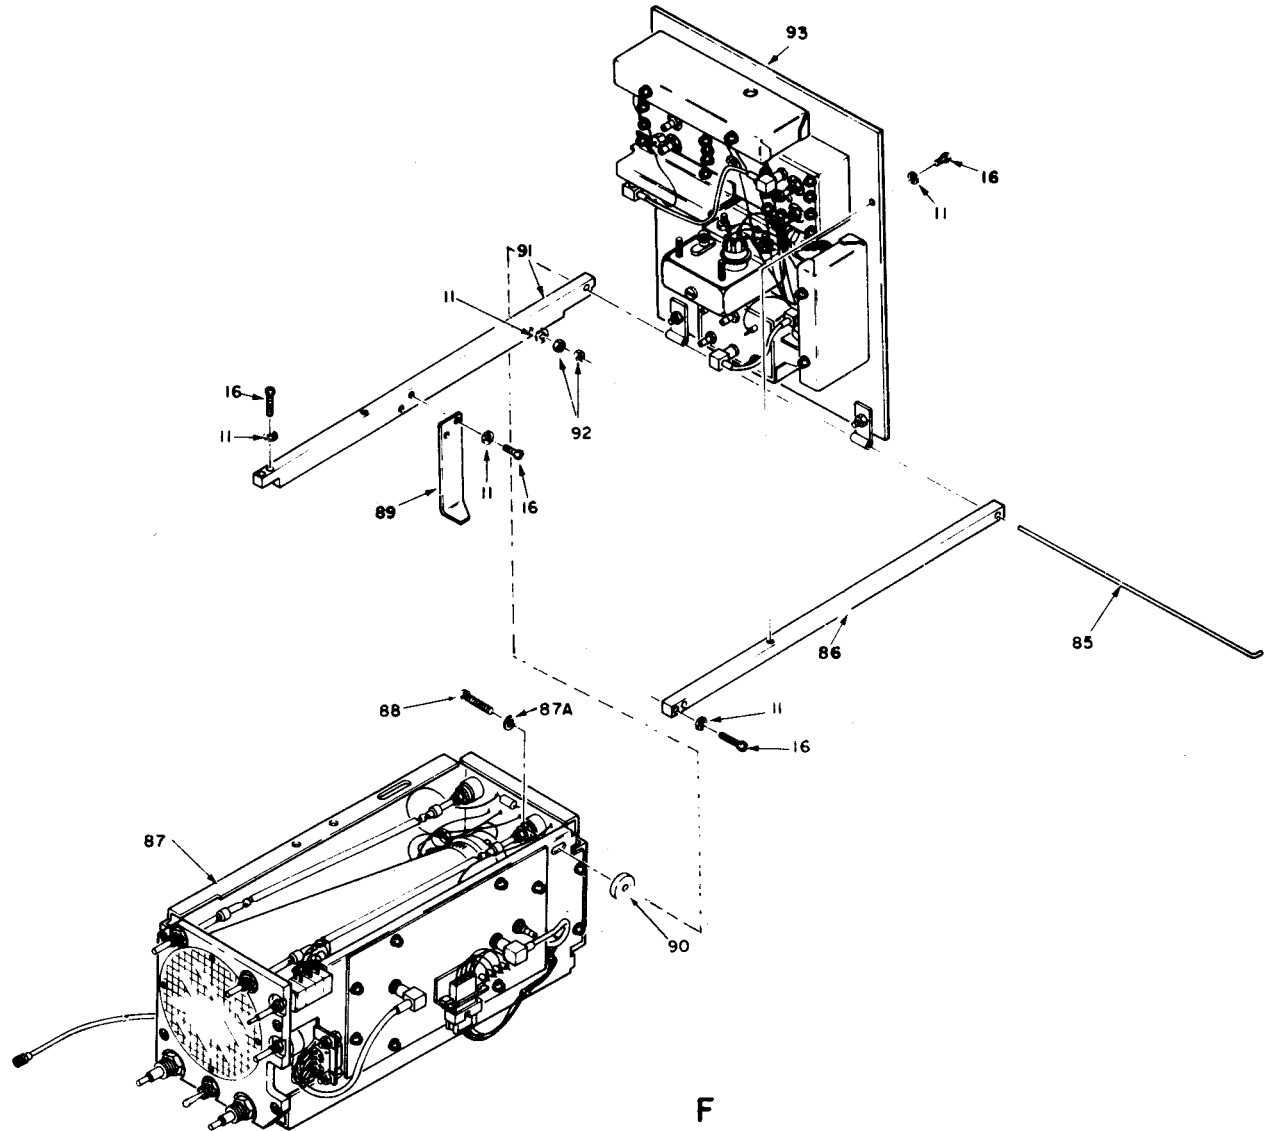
Mechanical Assembly Composite A1 (Sheet 5 of 8).
